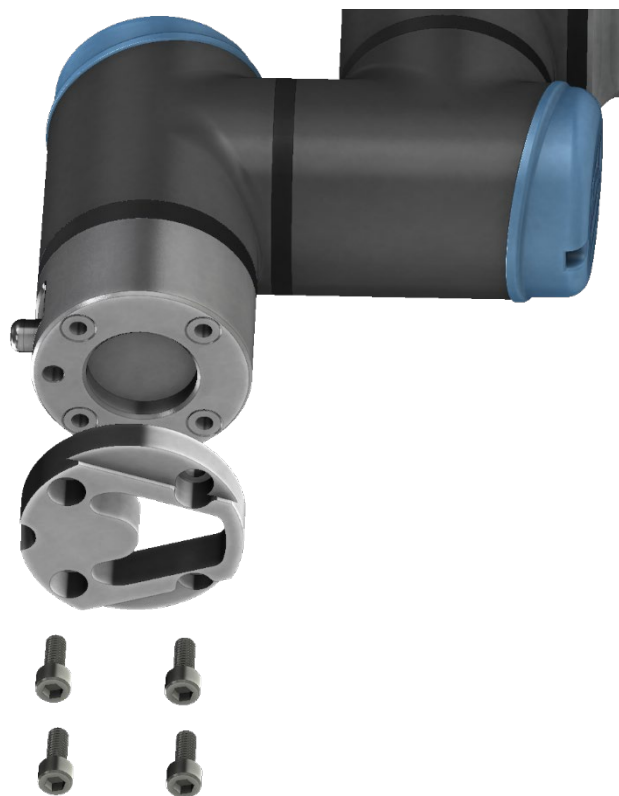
Mounting of UniGripper Robot Adapter top part to Robot
